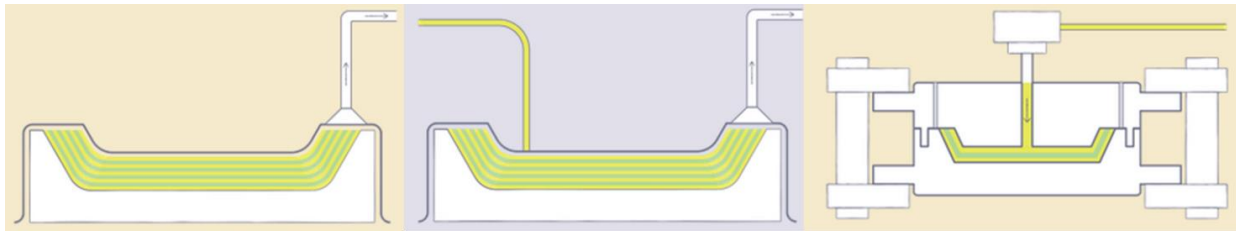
Closed molding methods includes vacuum bag molding (left), vacuum infusion (mid)
